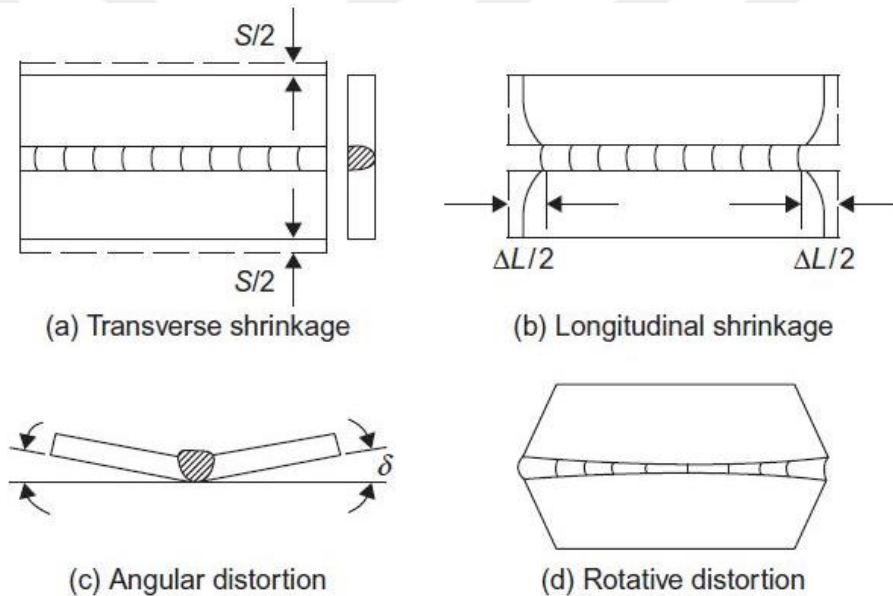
Basic types of welding deformation (Ueda and et al., 2012)
